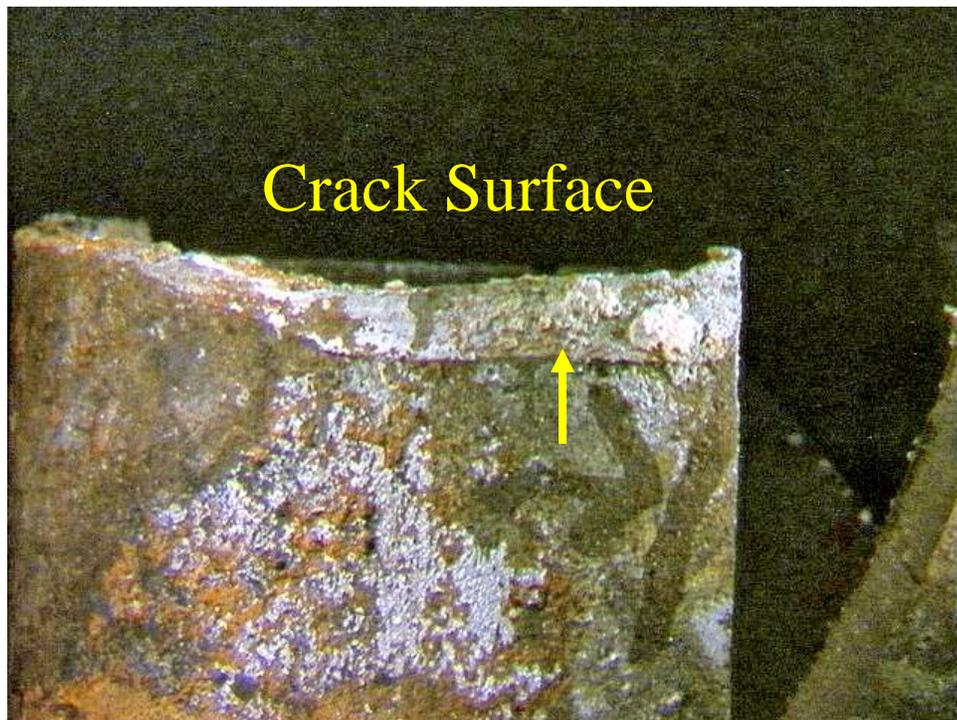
Close-up photo of the groove (arrow) adjacent to the crack surface at the point of maximum crack opening. Magnification 2.8X
